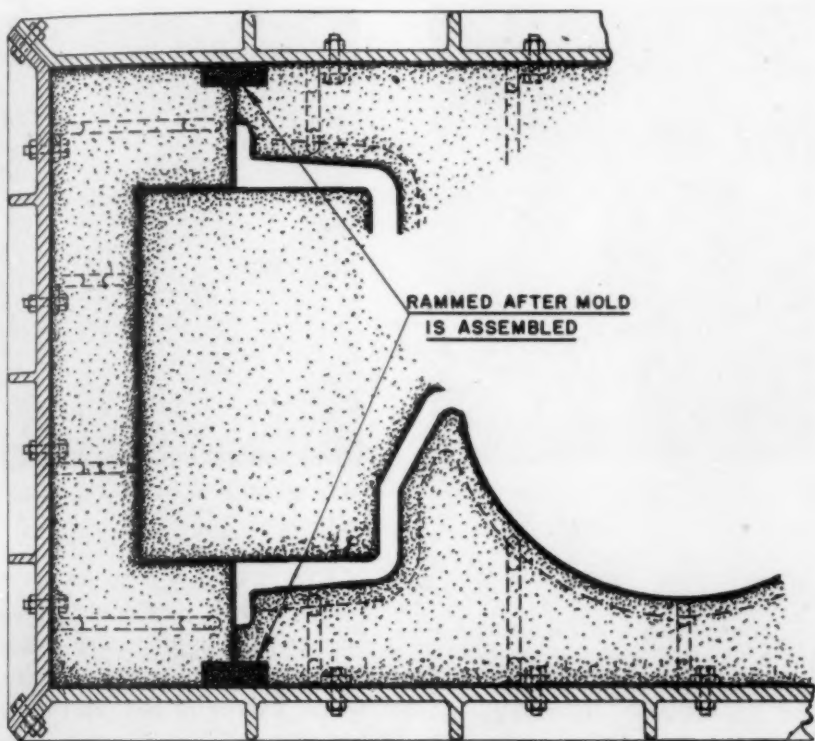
CHEEK ASSEMBLY SHOWING PARTINGS.
